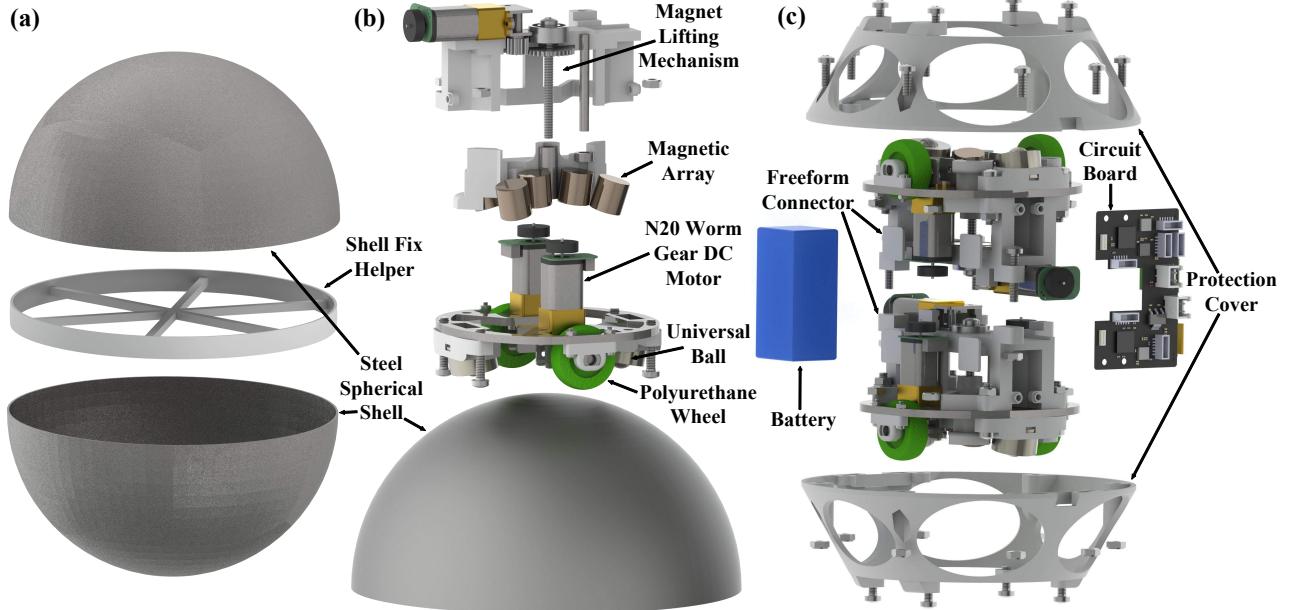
The mechanism design of the FreeSN modules. (a) Node module. Exploded view. (b) Freeform Connector. Exploded view. Partial section view. (c) Strut module. Exploded view.
